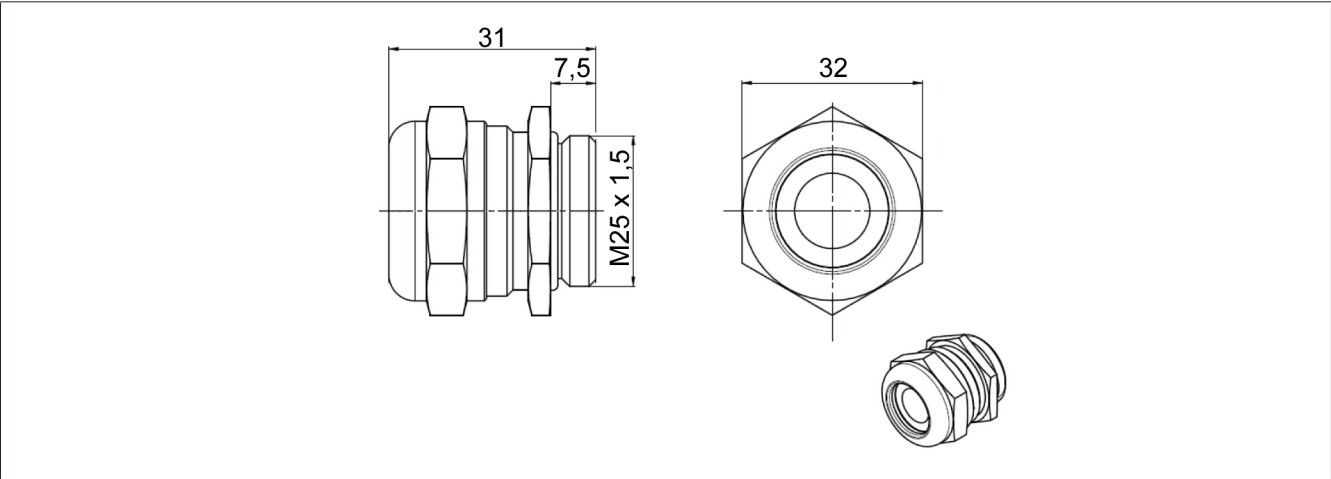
WADI cable screw connection; material: nickel-plated brass; clamping range 13...20 mm
